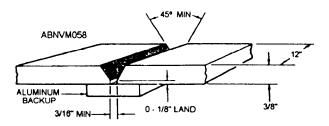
Joint design flat-position, single-pass butt welds in aluminum plate.
